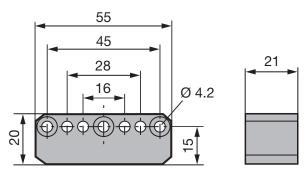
Installation dimensions of BTL5-P-5500-2 magnet
